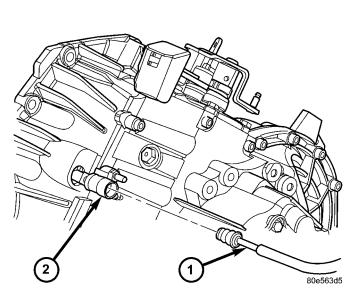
Clutch Slave Cylinder Hydraulic Connection
